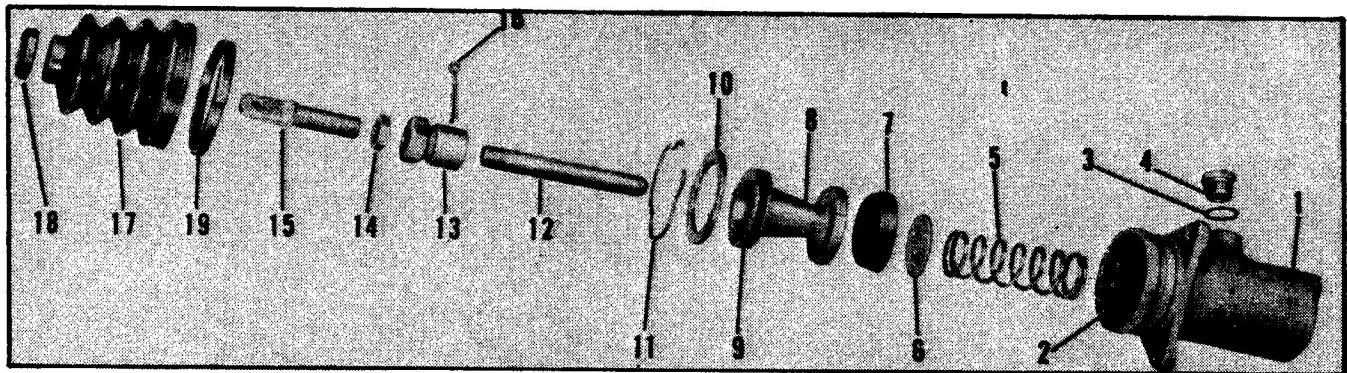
1-1/2-inch and 2-inch Master Cylinder - Exploded View
